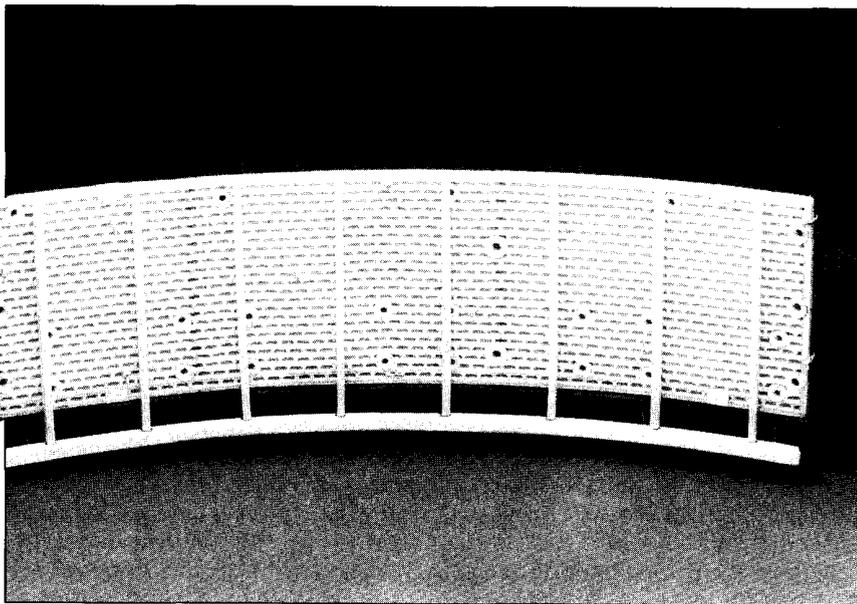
Runner and gating system for a P-900 armor plate section is designed for easy removal by knock-off. A primary runner extends along the bottom of the casting.
